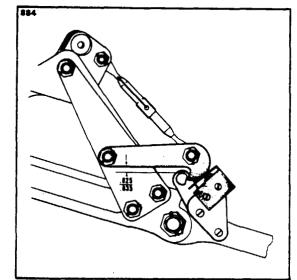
Adjustment of Main Gear Down Limit Switch
